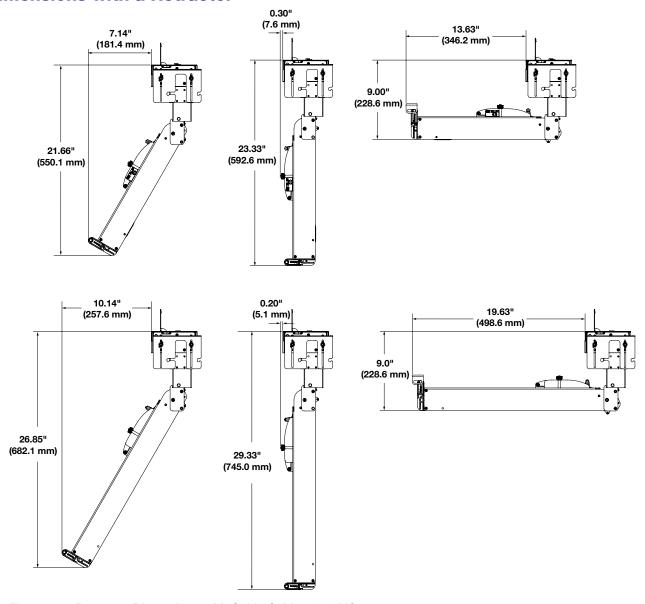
Retractor Dimensions with Cable Cubby 1252 MS
